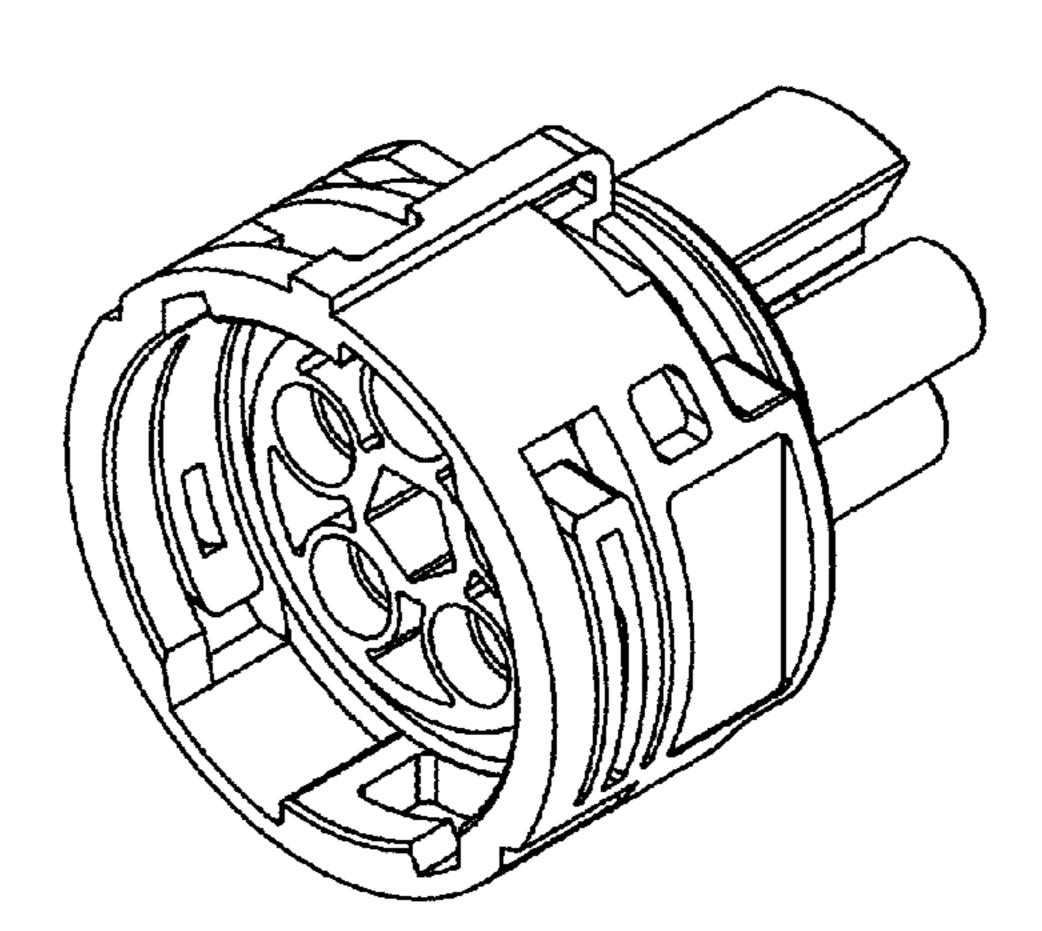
is a front perspective view of a ninth embodiment of a male power connector housing, showing my new design; FIG. 17 is a front perspective view of a tenth embodiment of a male power connector housing, showing my new design;
